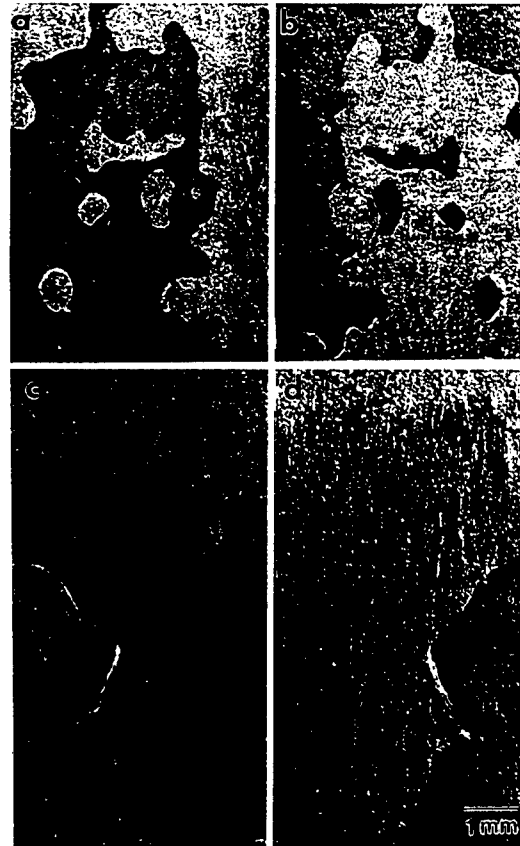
Macroscopic views of the fracture surfaces of the 0° (a, b) and 45° (c, d) joints. Failure occurs by debonding on both interfaces coupled with metal shear through the interlayer. The brighter regions correspond to the "metal side" of the fracture surface.
